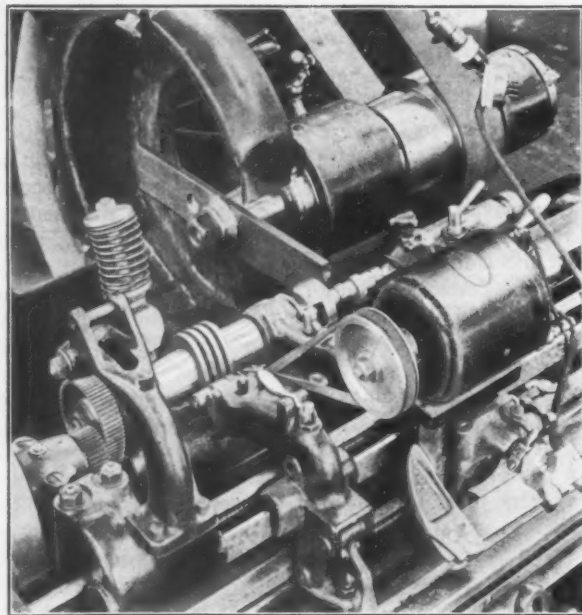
Norton Camshaft Grinder Arranged for Grinding Master Cams.
